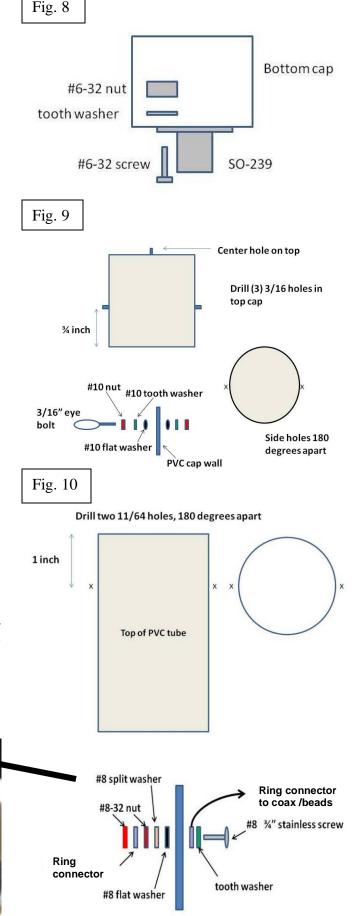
Prepare top PVC cap as shown in diagram. Drill the 3 holes with 3/16 in. drill. Assemble the hanger support using eye bolt, #10 nut, #10 washer (top), #10 washer, tooth washer, #10 nut (inside.) Side supports use eye bolt, #10 nut, #10 tooth washer, #10 flat washer (outside), #10 flat washer, #10 tooth washer and #10 nut (inside.)
